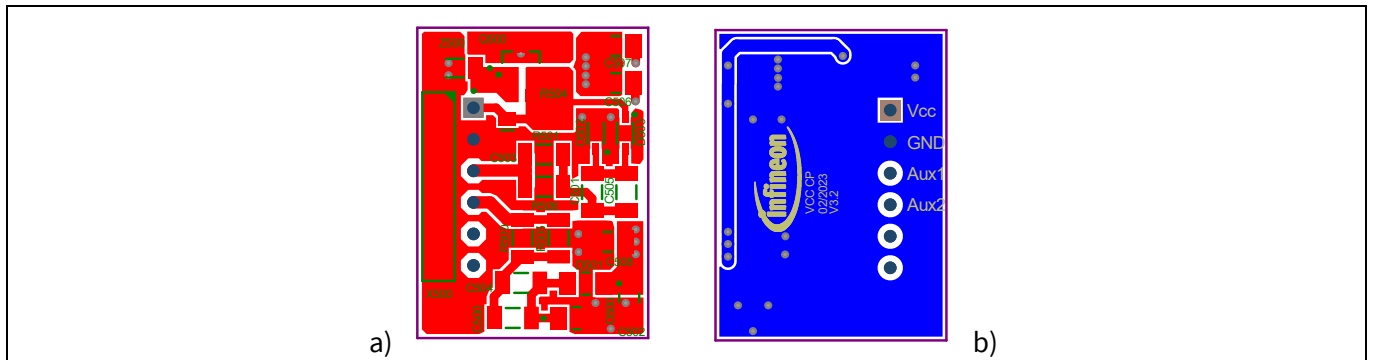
PCB of the V_{CC} board: a) top side and b) bottom side
